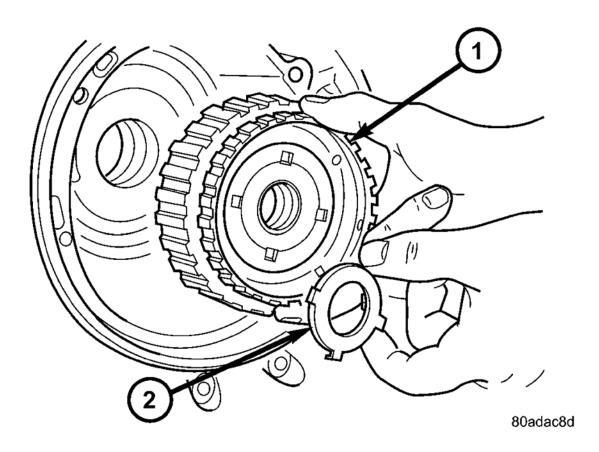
Installing Front Carrier/Rear Annulus Assembly And #6 Needle Bearing Courtesy of CHRYSLER LLC
